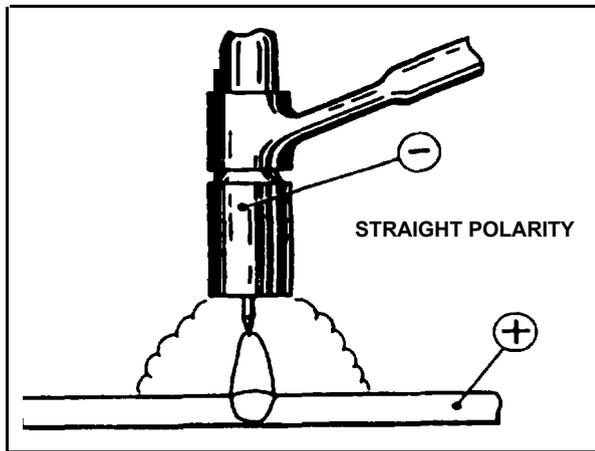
Set TIG welder to DC current, straight polarity for welding mild steel, stainless steel and titanium
